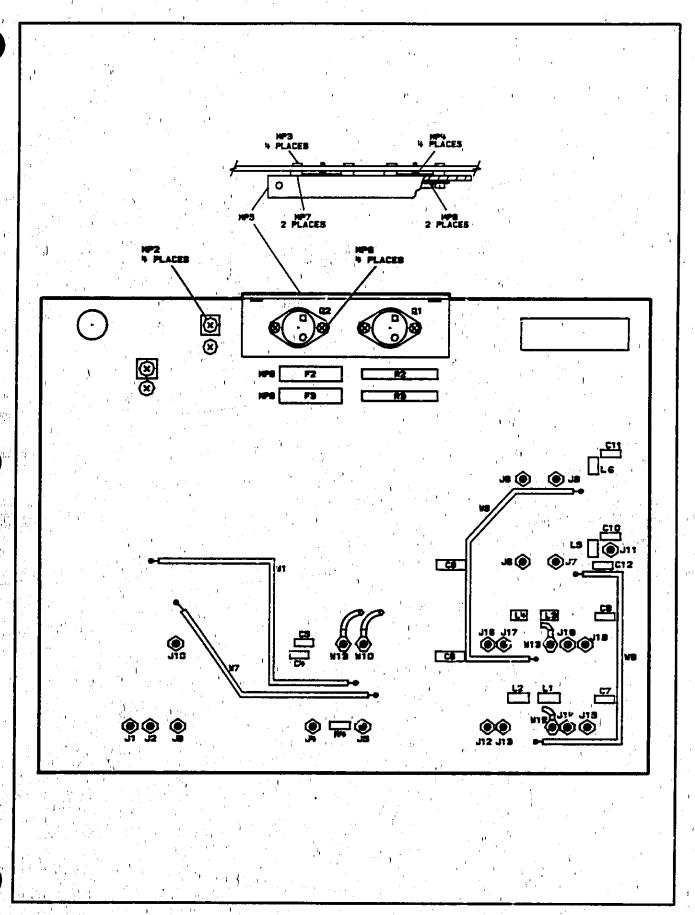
(c). A27 Motherboard Assembly Component Side (CHANGE 17)
